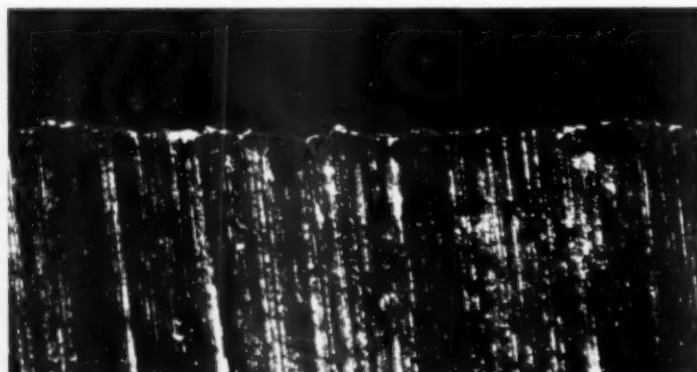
Enlargement of the cutting edge of a tool hand ground by a good operator at Wright shows the relative roughness of surface obtained. Finish: 20-25 micro-inches r. m. s. (Magnification 100X).
